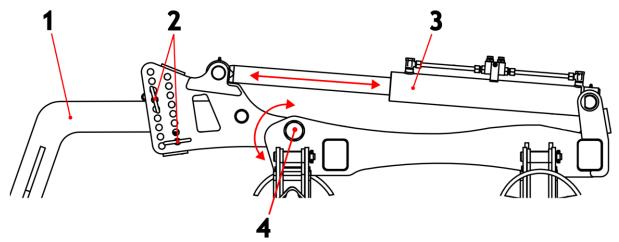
Hydraulic roller lift (1 - roller arm, 2 - working depth adjustment pins, 3 - actuator, 4 - arm pivot pin)
